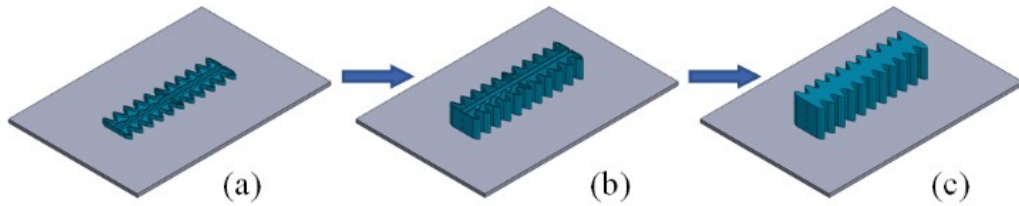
3D printing of the snake body: (a) Starting of the printing; (b) In printing; (c) Completion of the printing.
